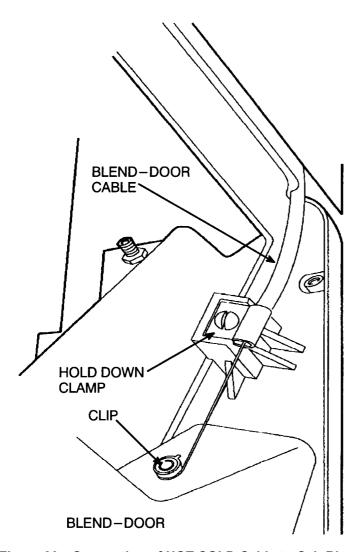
Connection of HOT-COLD Cable to Cab Blend-Door Assembly
